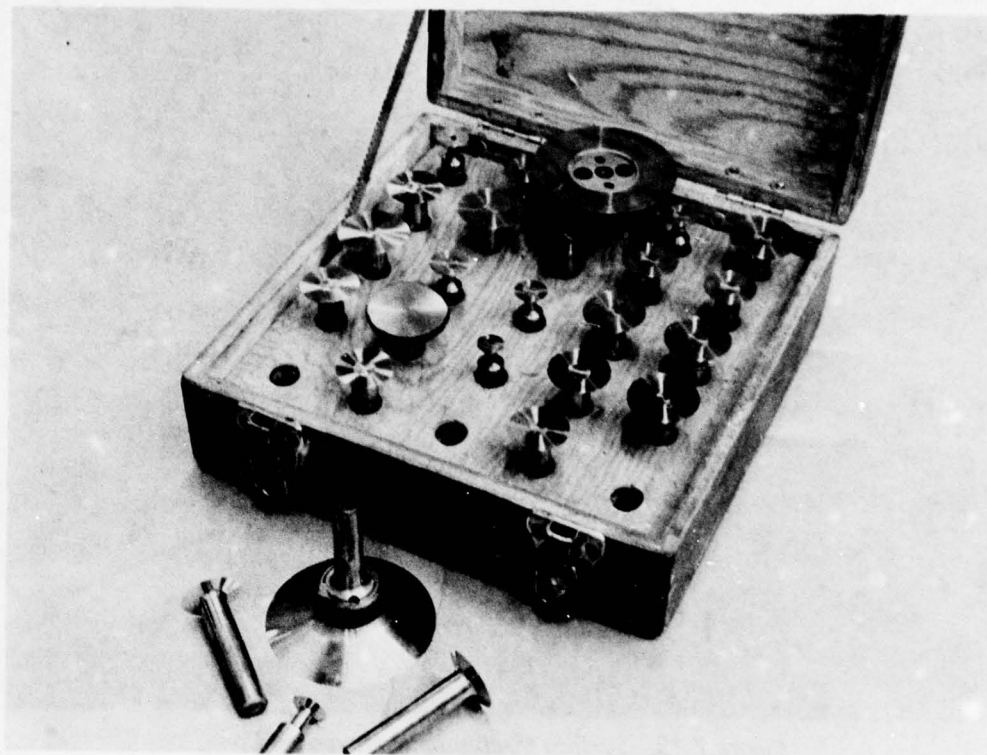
Assorted Cutters for Machining Honeycomb Core
